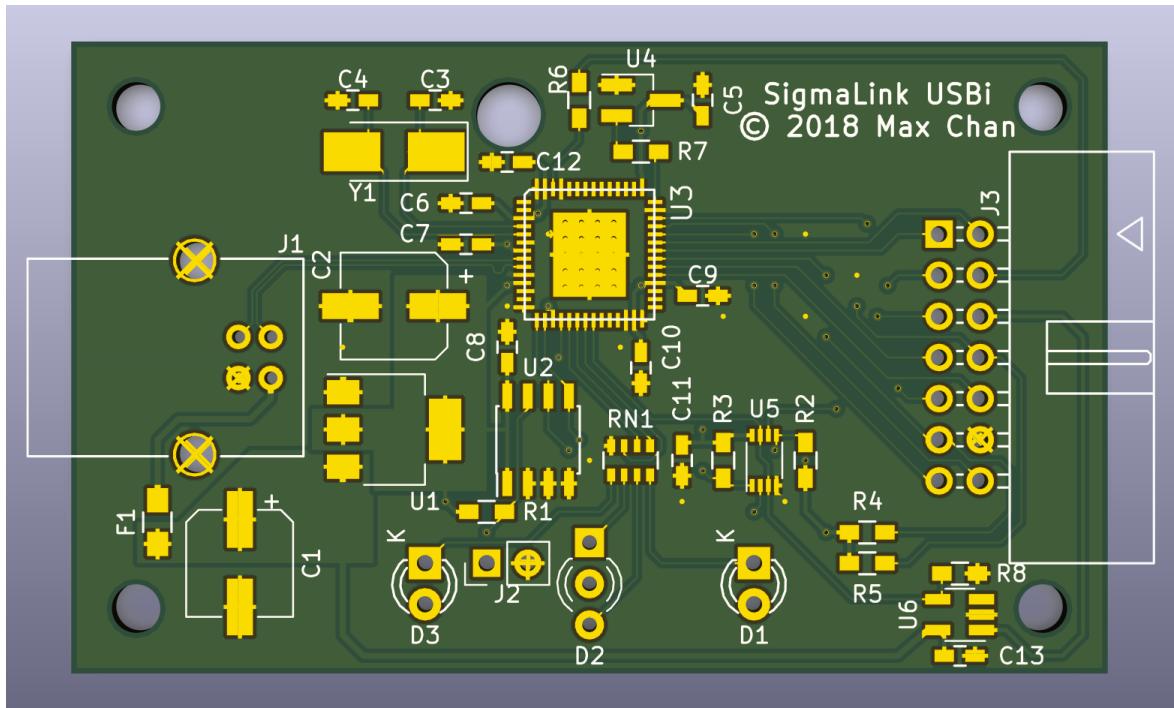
Board silkscreen and parts placement for SigmaLink USBi v1r2.
